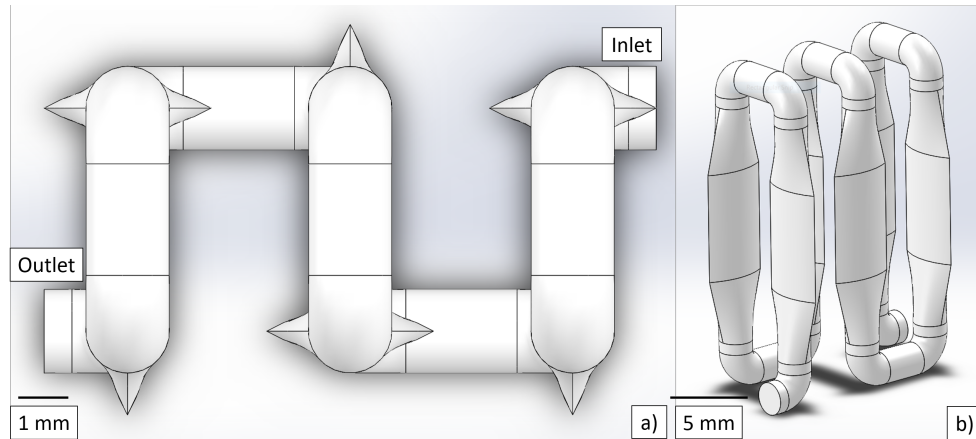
CAD representation of the mixer block. a) shows a top view, with the inlet an outlet. b) shows a general view of the design
